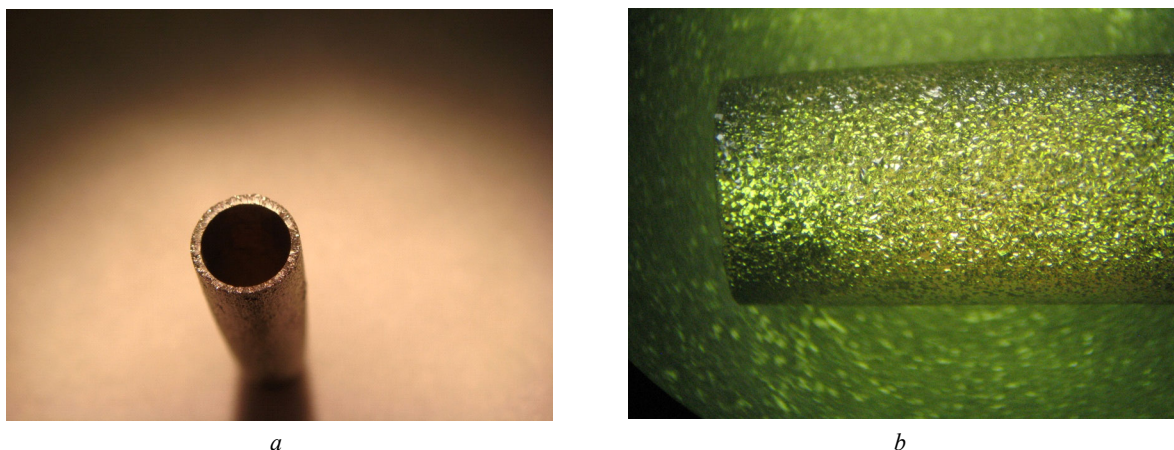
Photographs of CVD diamond tube developed: top view (a); axial view (b)
